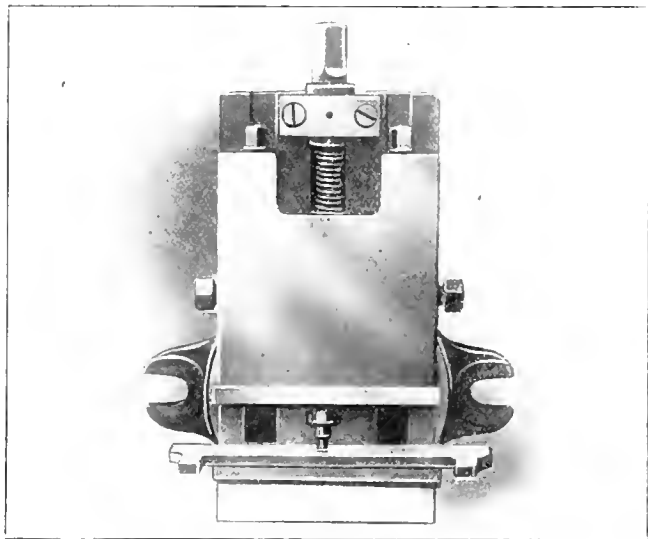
View of Machine Vise, showing how a Gage is Clamped without Springing it.
